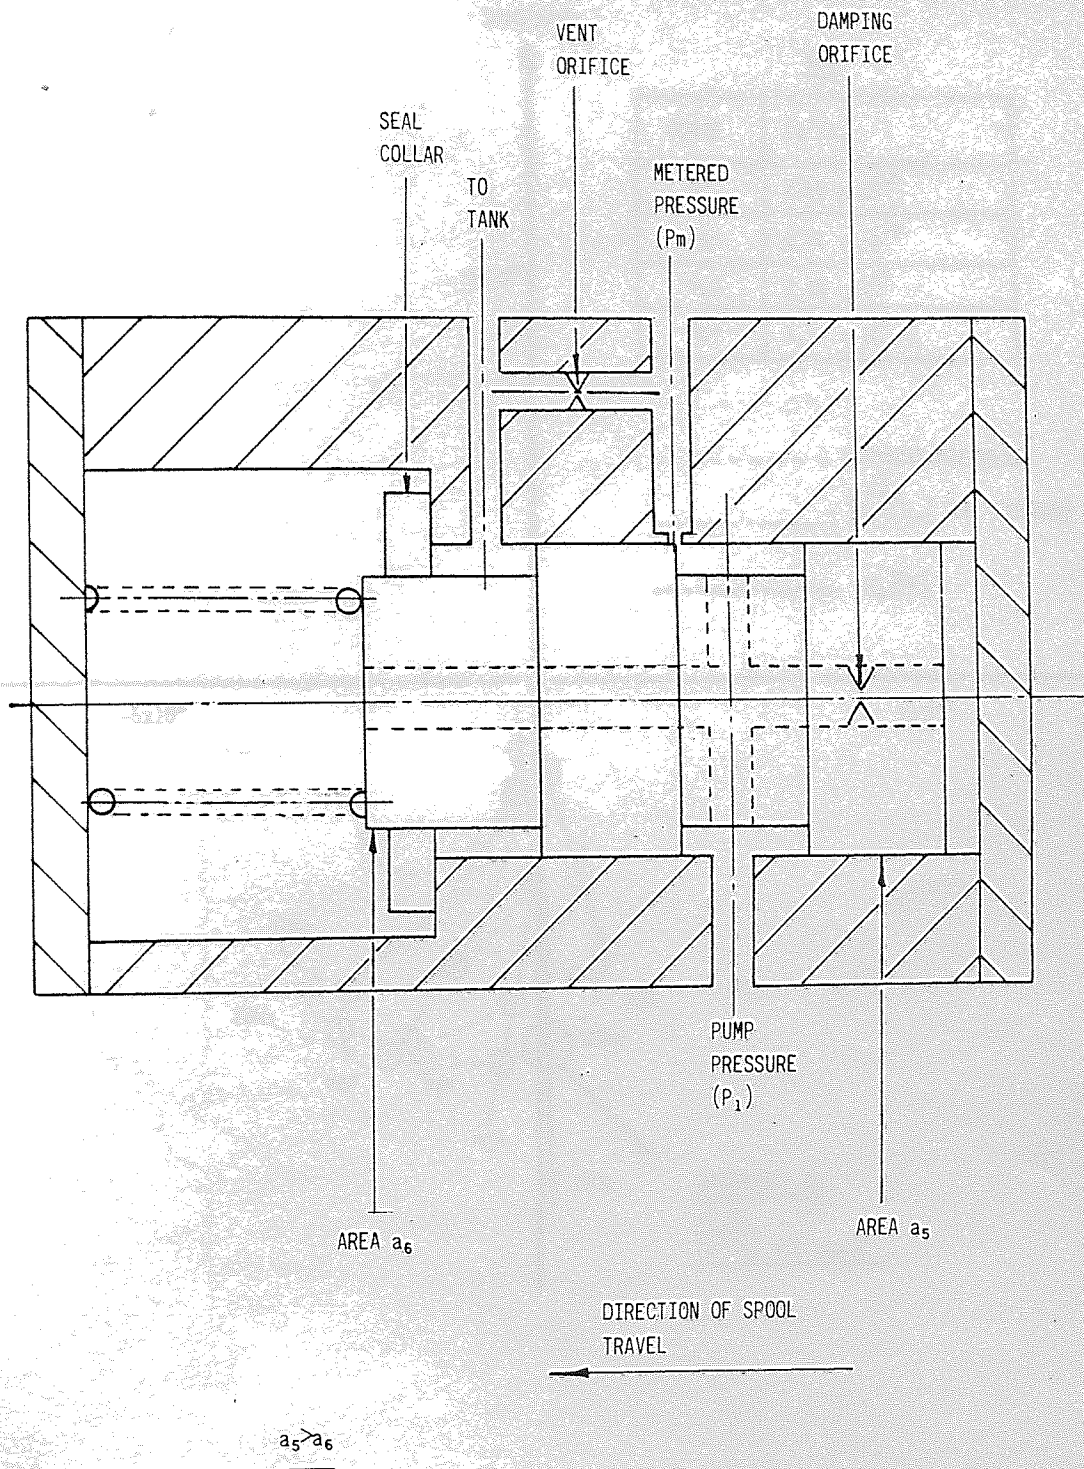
A SKETCH OF A PRESSURE COMPENSATING VALVE WITH A STEPPED PISTON AND A SEAL COLLAR
